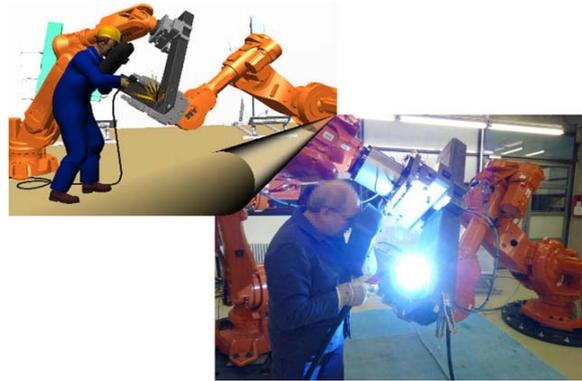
The multi-robot system assists the worker in the welding process [11].
